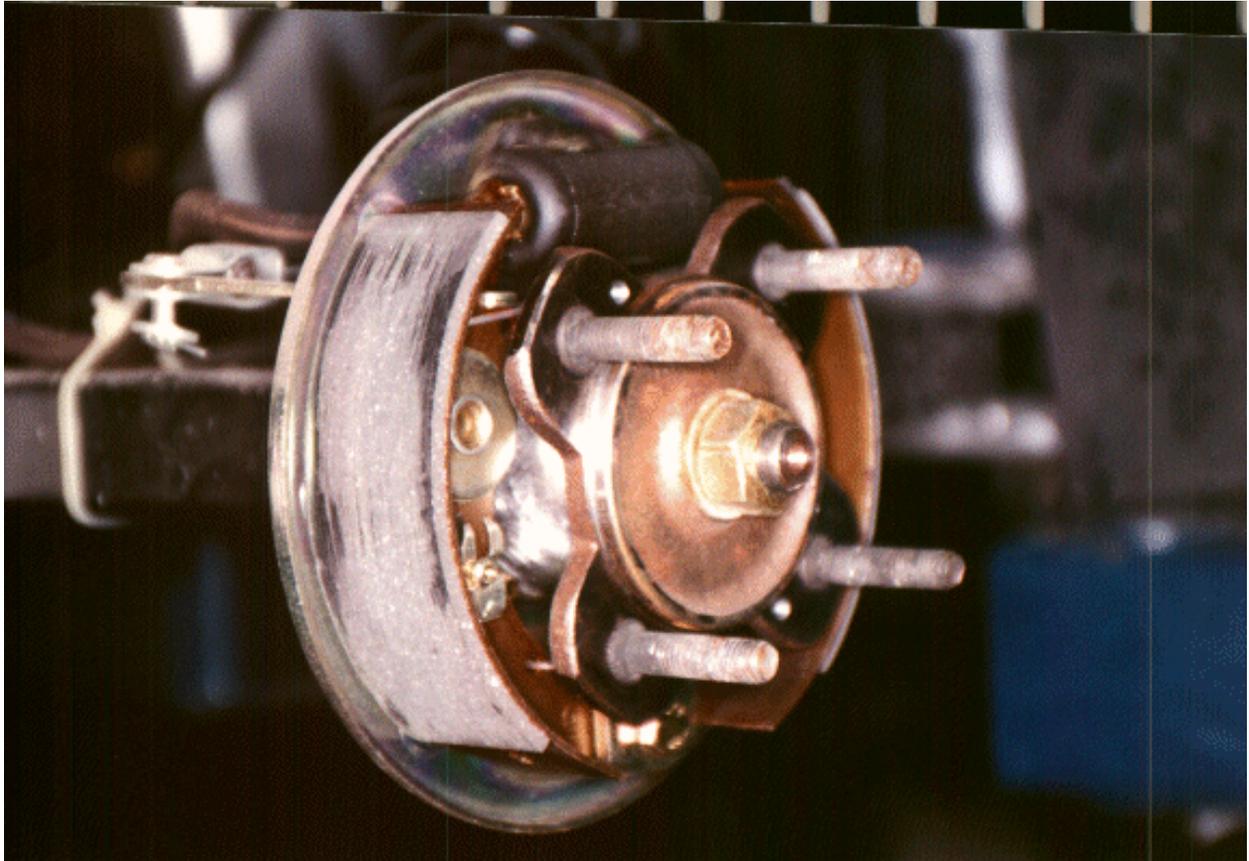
Left Rear Brake Cylinder and Brake Pads
